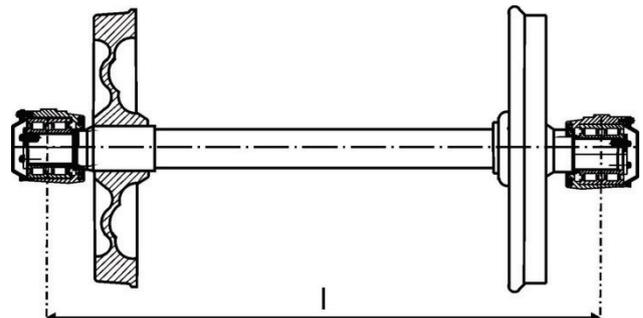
Wheel assembly with cylindrical roller bearings [12, 13]
